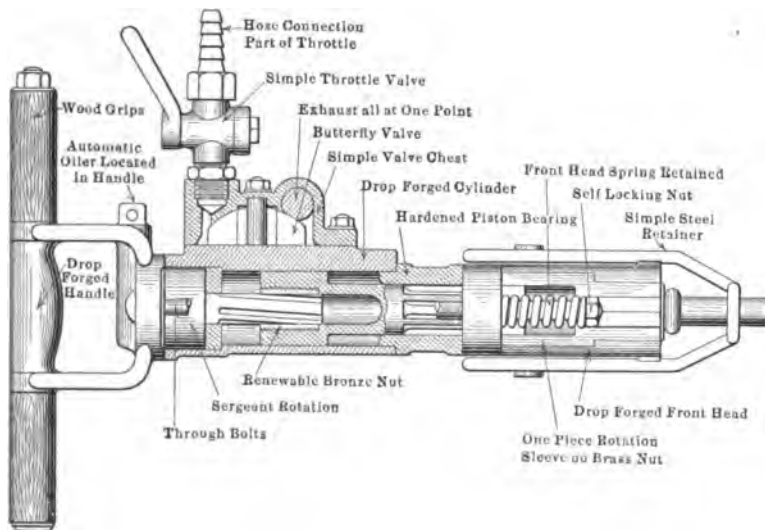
Jack-hammer drill. Hand-held, rotating-hammer drill.
